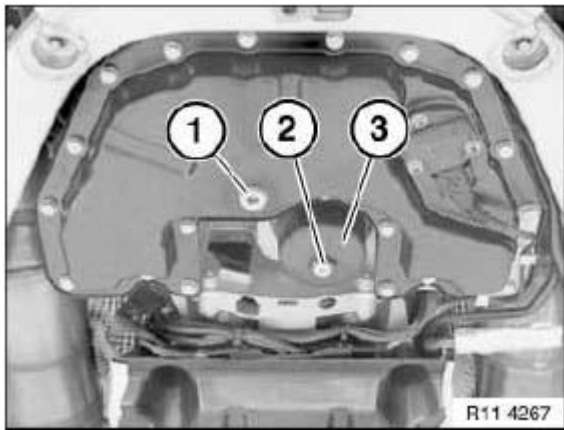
Identifying Oil Drain Plug, Oil Filter Cap And Oil Filter Cover
